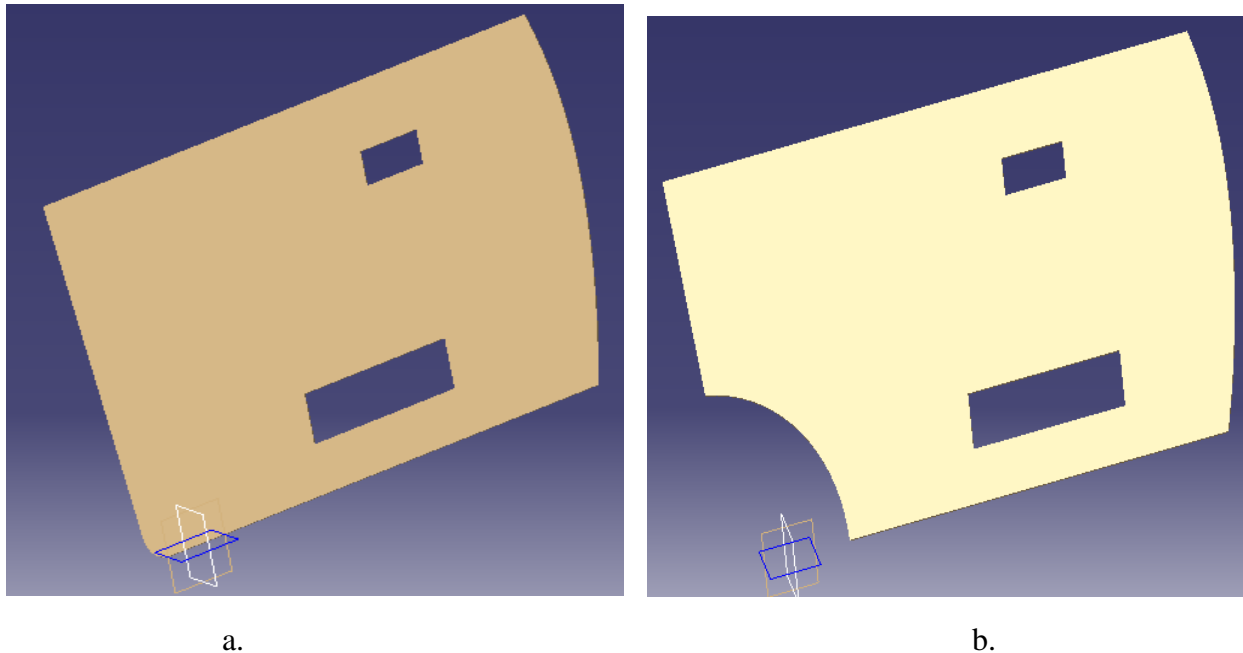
The 3D modeling of the internal door panel; *a. front left door panel; b. rear left door panel
